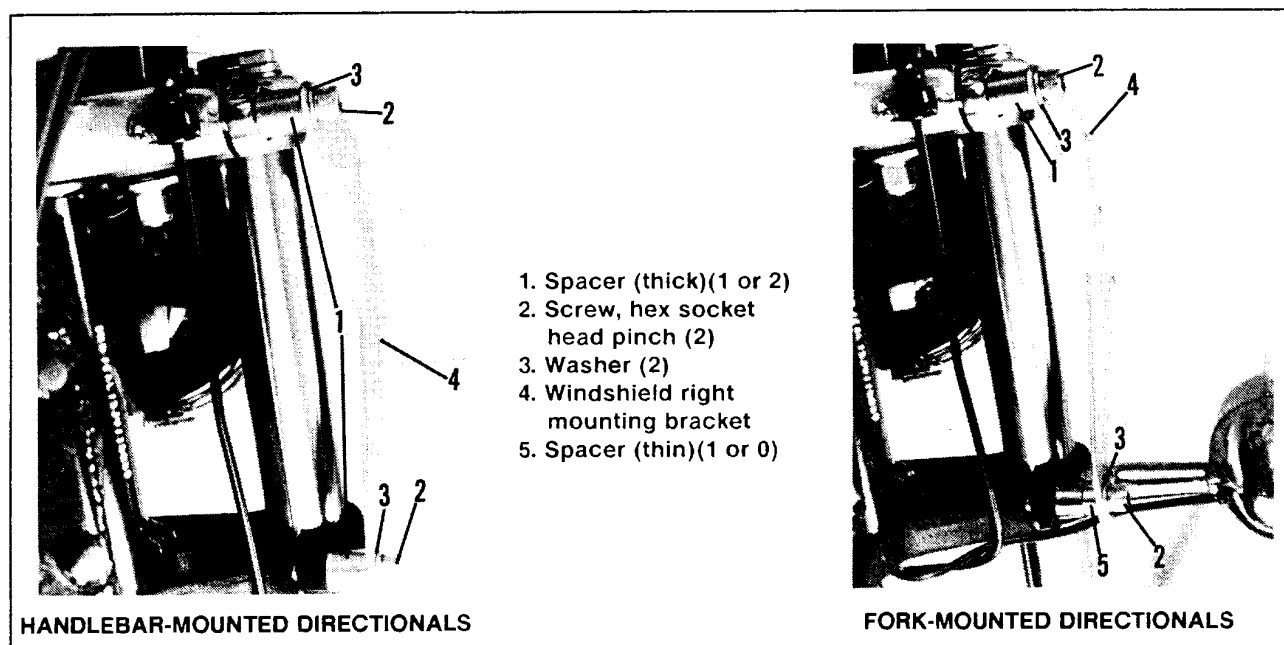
Accessory Compact Windshield Kit 58006-87 -- Right Side Mounting Hardware
